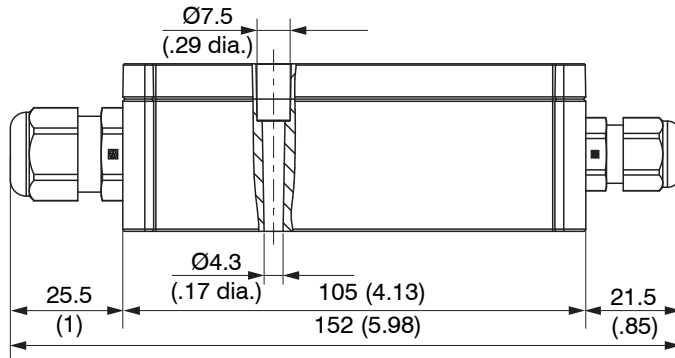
Dimensions of MSC7802 controller, dimensions in mm, not to scale
